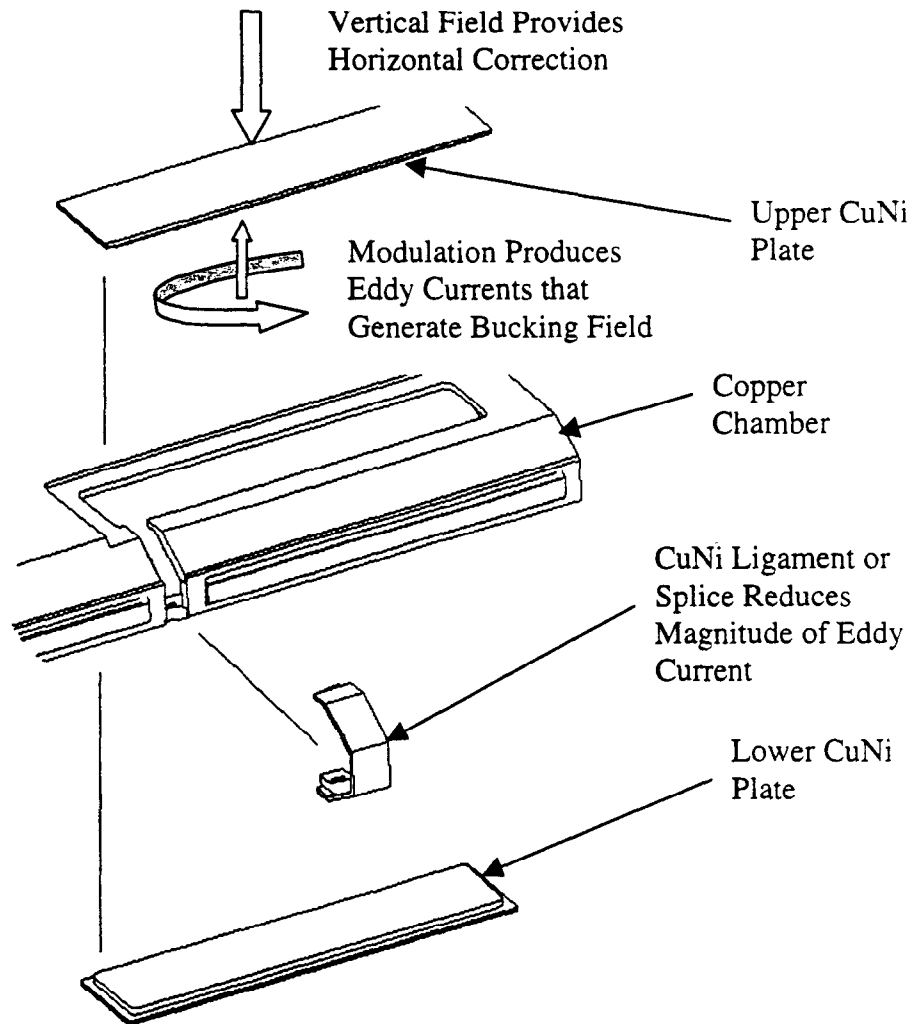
Exploded end view of qfc chamber with cupronickel™ (70/30) eddy current break
